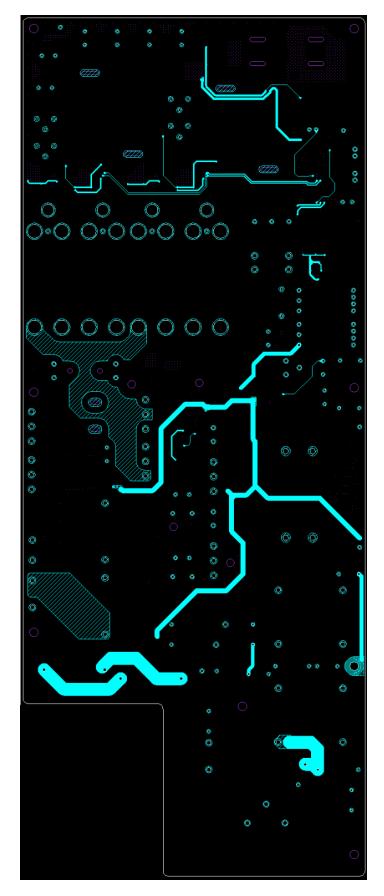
shows the layout of Layer5 of the PCB of this power supply.
